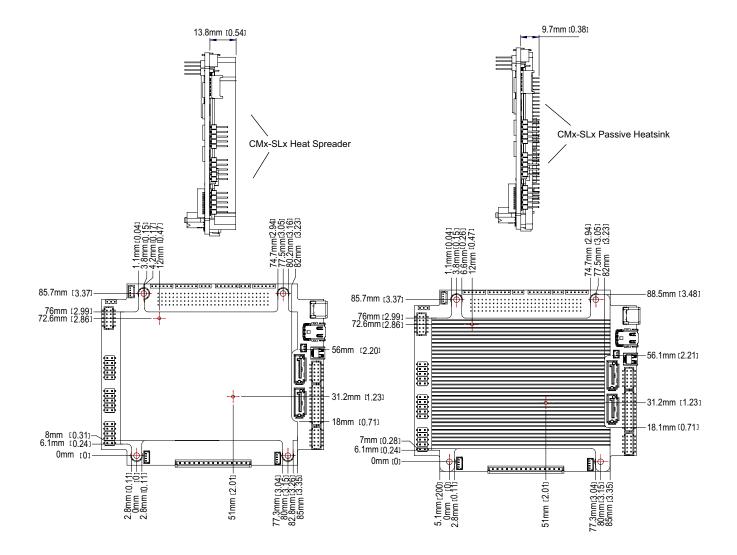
provides dimensions and mounting orientations of the passive heatsink and the heat spreader.
